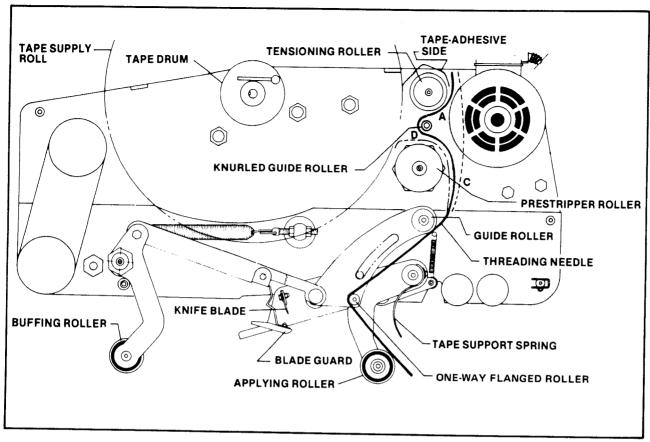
A - TAPE THREADING DIAGRAM - TOP TAPING HEAD - LEFT SIDE VIEW
